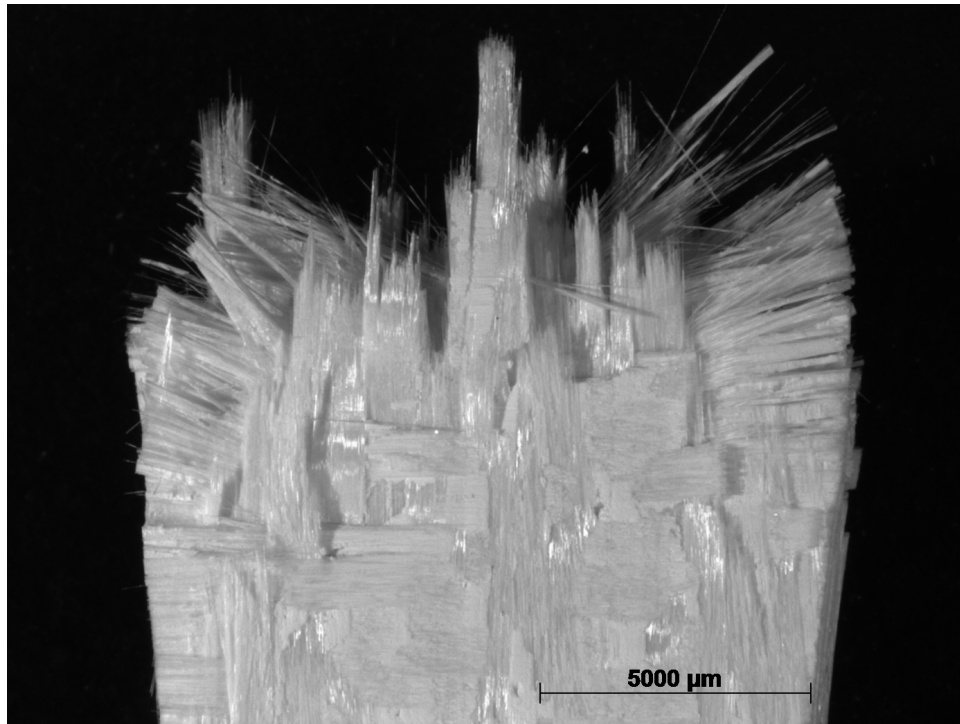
Fracture surface of Nextel™ 720/AS dogbone specimen 12-113 tested in monotonic tension to failure at 1100°C in laboratory air, top, right side
